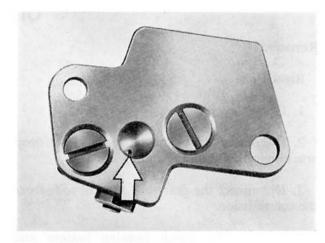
Rear view of timing chain tensioner. The arrow indicates the oil feed hole to the tensioner body
